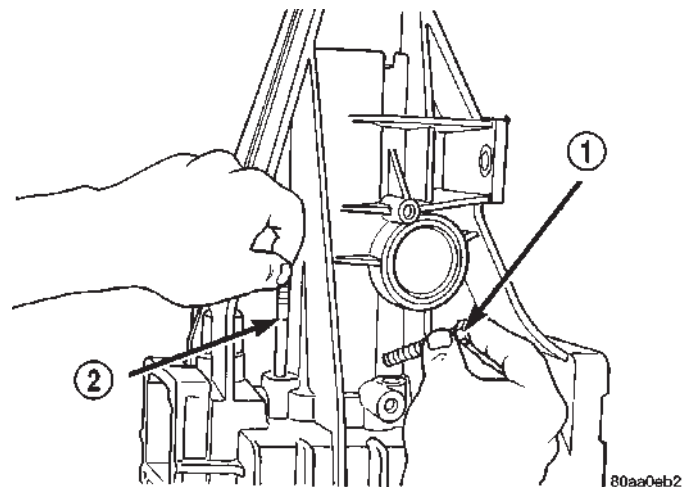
Pilot Stud Tool And Retainer Bolts - 2WD
